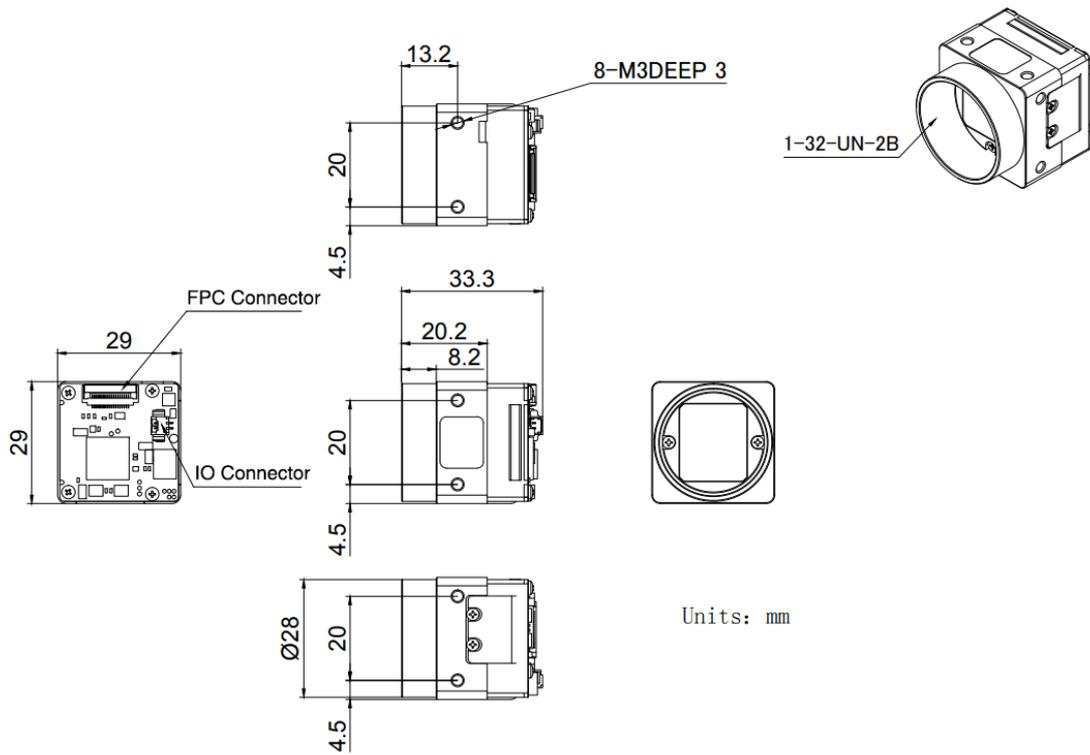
All-in-one horizontal FPC camera mechanical dimensions (C-Mount)
